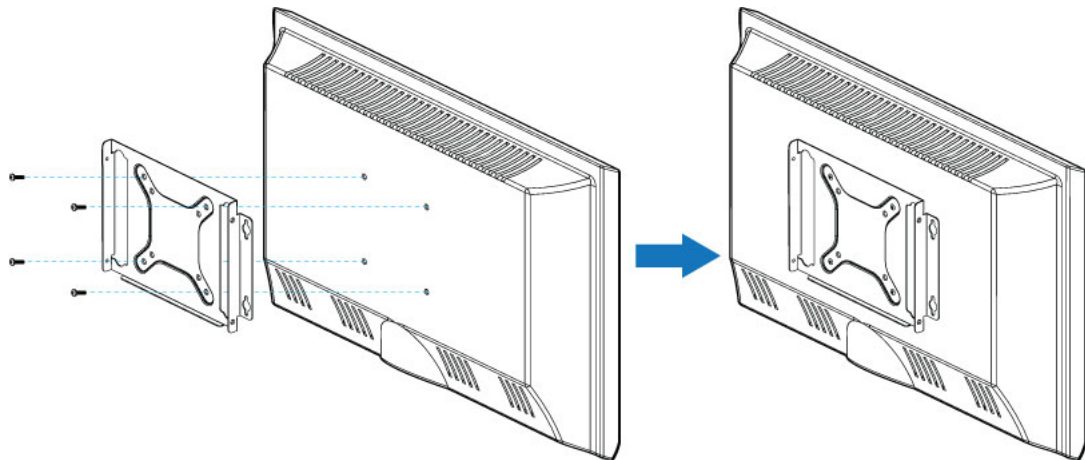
Hole patterns of VESA / keyhole mounting bracket for KBox F-220 Series
